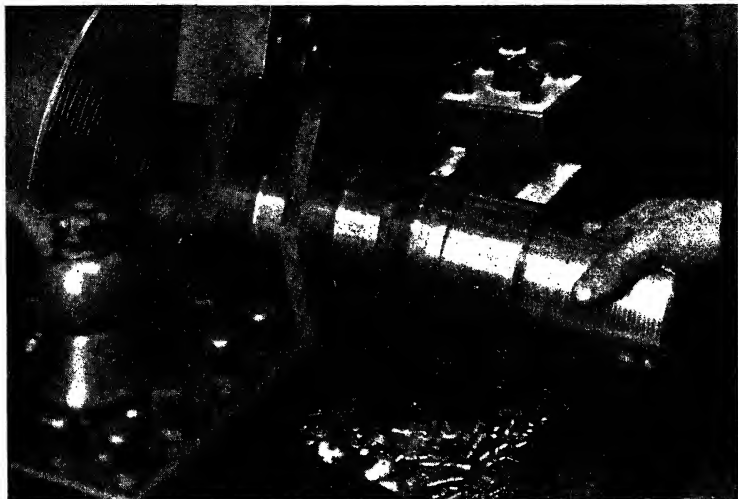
PRODUCTION OF LARGE MACHINED FITTING ON NO. 8 WARD LATHE (5).
